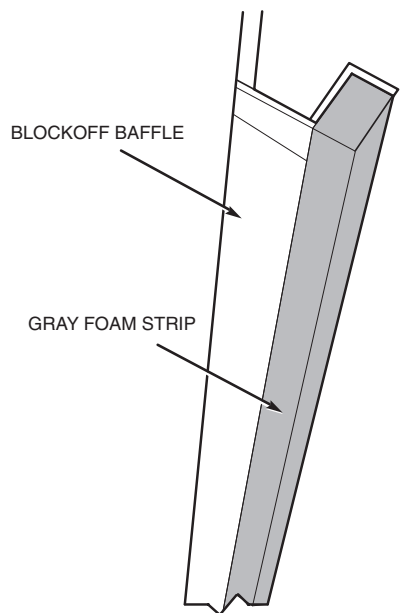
Economizer Hood Assembly (Right Side/Center Economizer Hood Shown)
